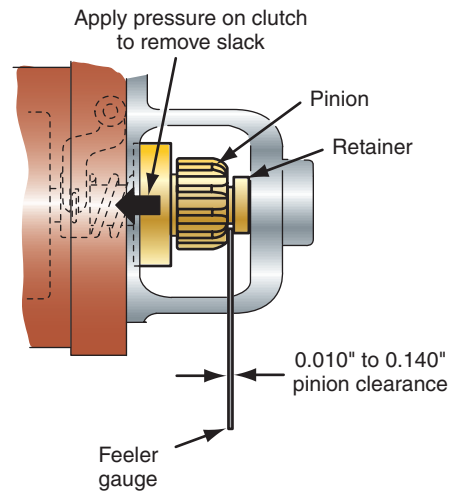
Checking the pinion gear to drive housing clearance.
